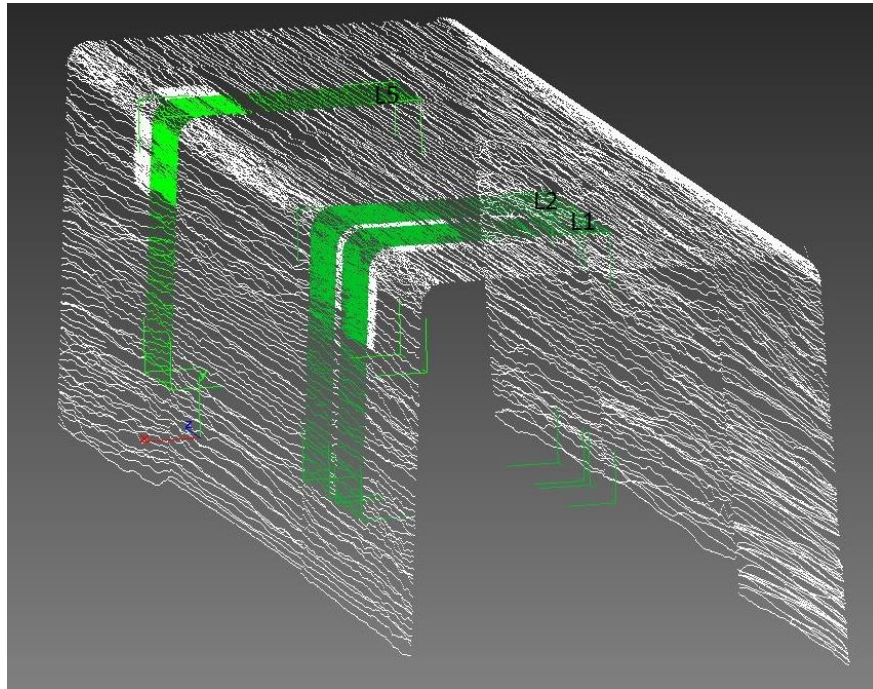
Point cloud file of the invar tool with specimen locations highlighted
